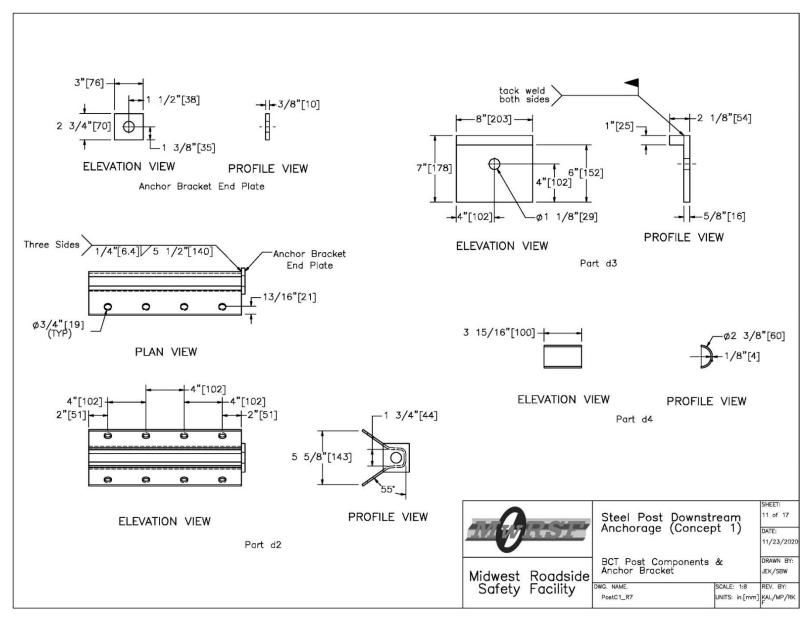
BCT Post Components and Anchor Bracket Details, Test No. SPDA-1
